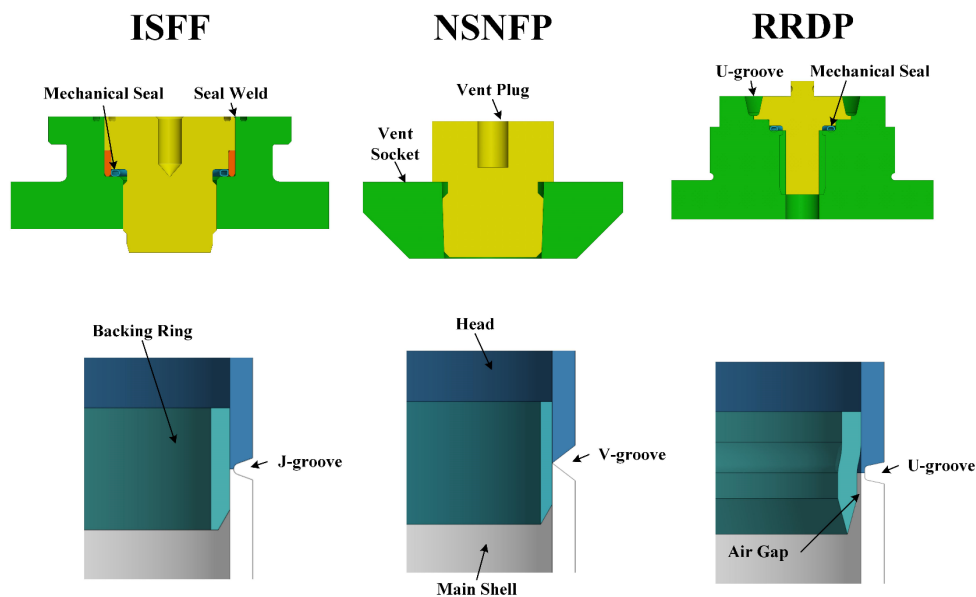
Weld joint geometry of ISFF⁴⁰, NSNFP¹, and RRDP DOESC vent port welds joining the vent plug to the vent socket (top) and circumferential closure weld joining the head to the main shell (bottom).
